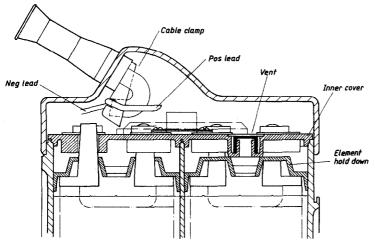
Sideview of top assembly of miners' cap lamp battery.
